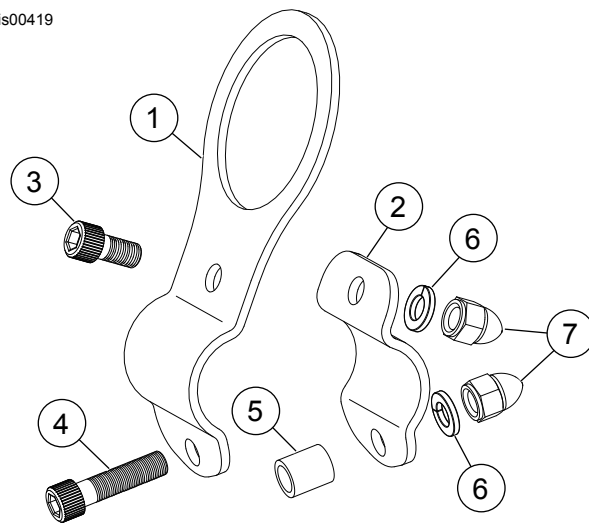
Service Parts for Wide Glide Gauge Bracket (Single Gauge Bracket Shown)
